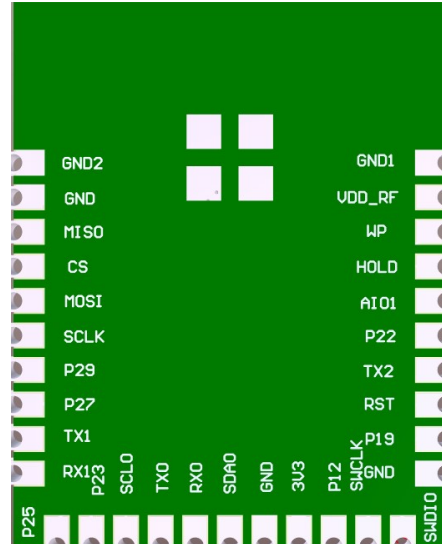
YQF-6012-00 module SMT footprint(unit: mm)
